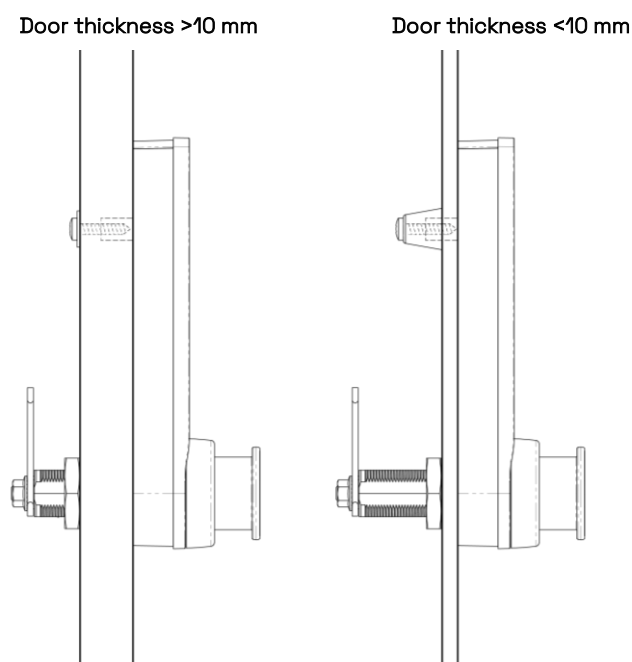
Side view of the GL7p after installation with different door thicknesses
